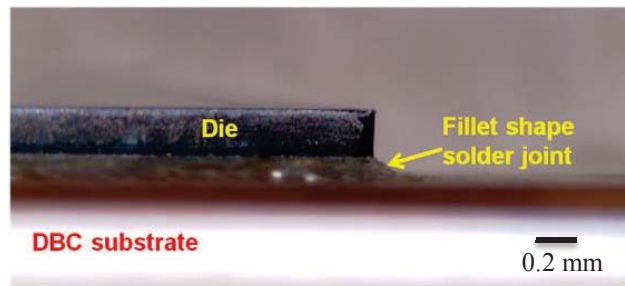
Packaged sample with fillet joint using the process in Figure 3-11.
